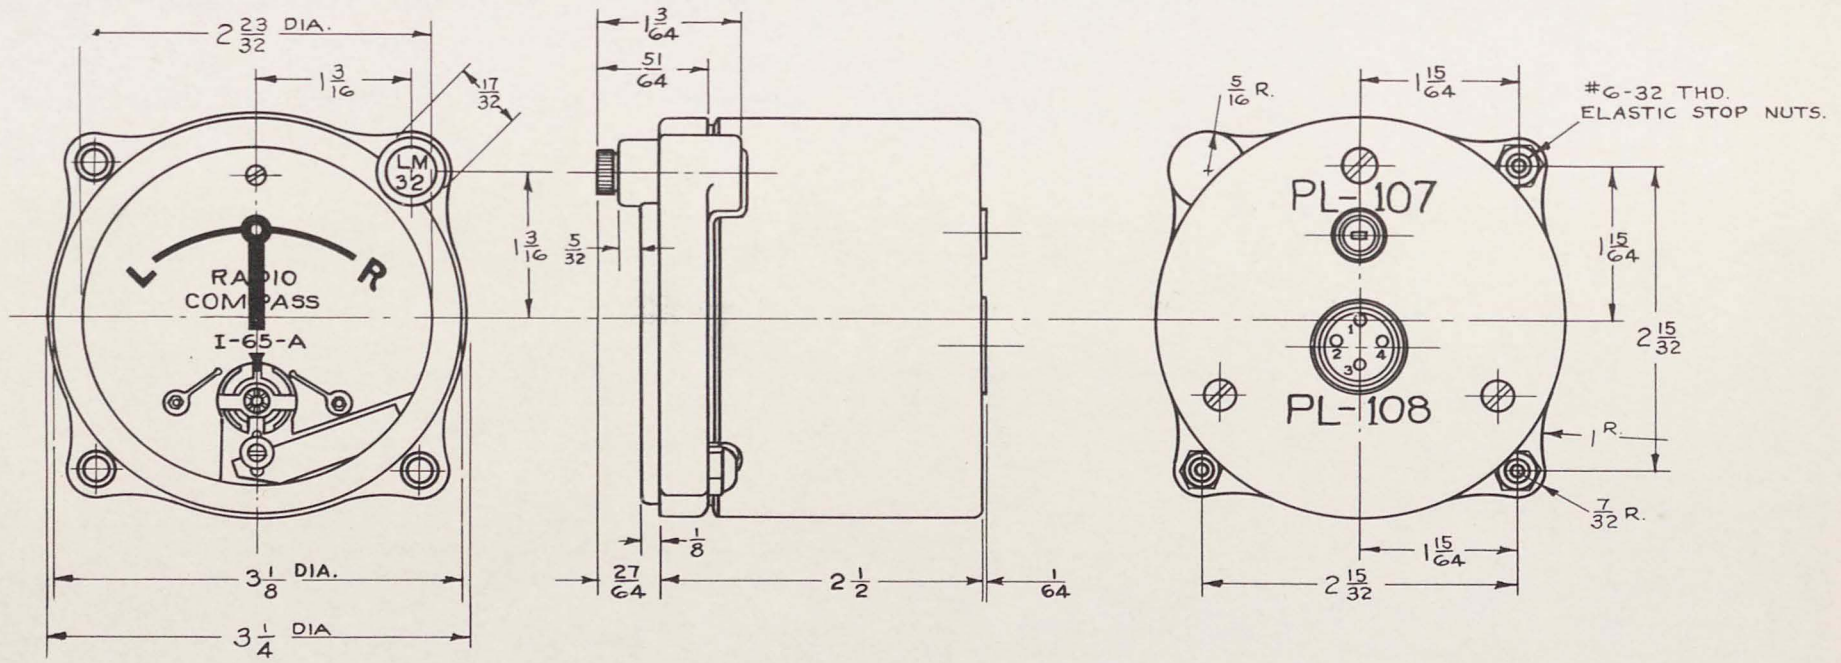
Compass Indicator I-65-A, Outline Dimensional Drawing
